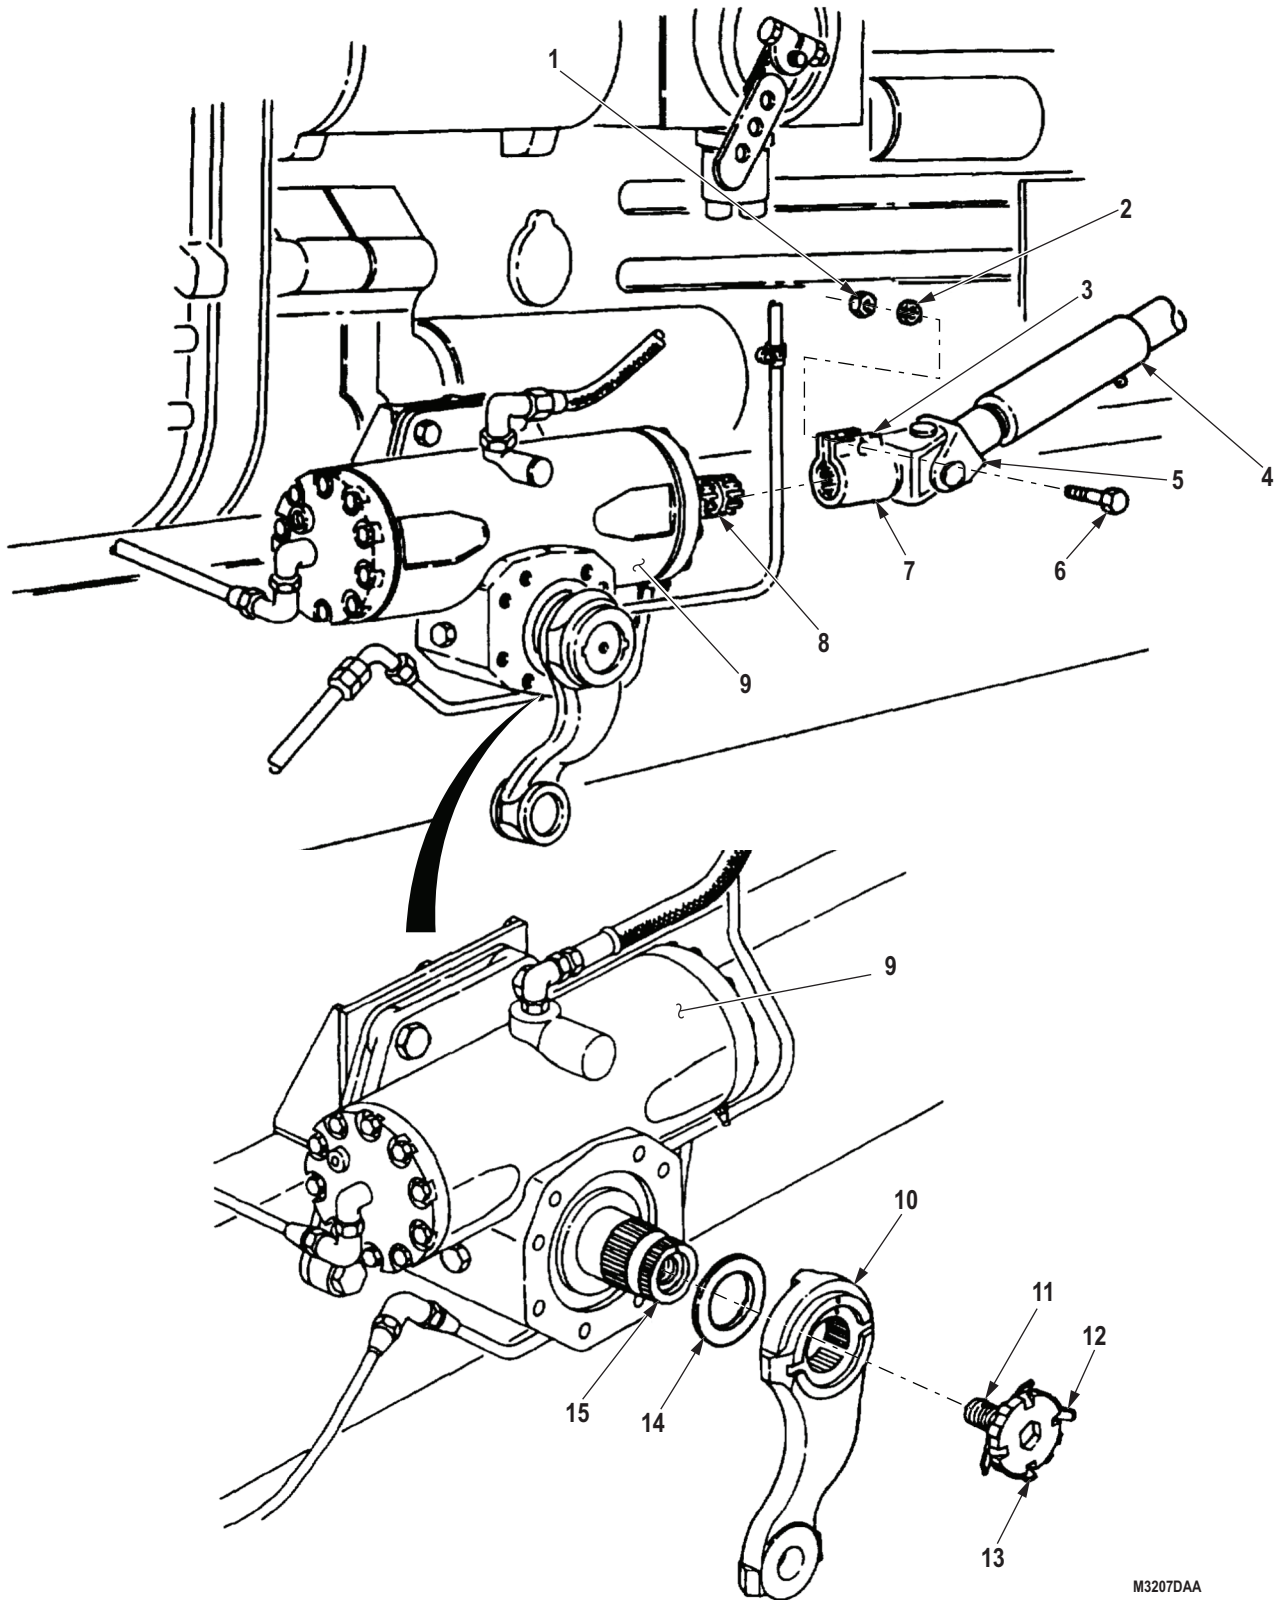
Steering Gear (Sheppard) Removal (M939A2).
